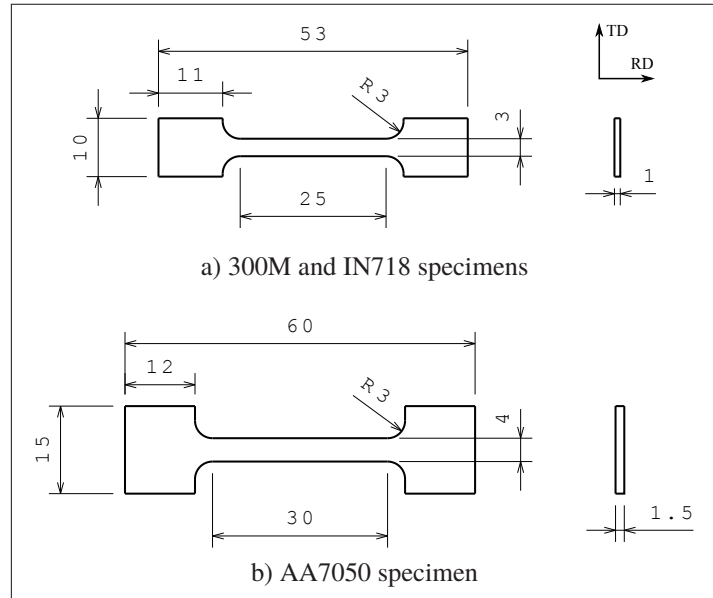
Drawings of the machined micro-tensile specimens used for a) 300M and IN718, b) AA7050 (dimensions in mm)
